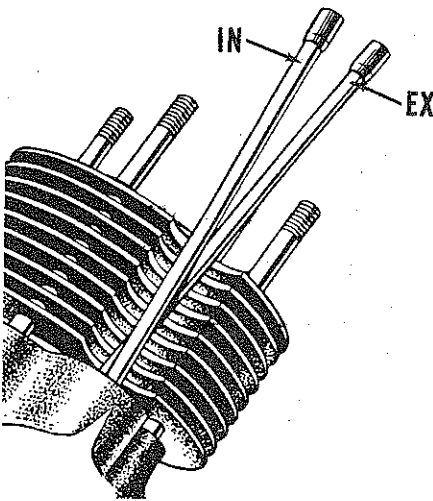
The inlet cam follower is on outside, exhaust on inside as shown.
